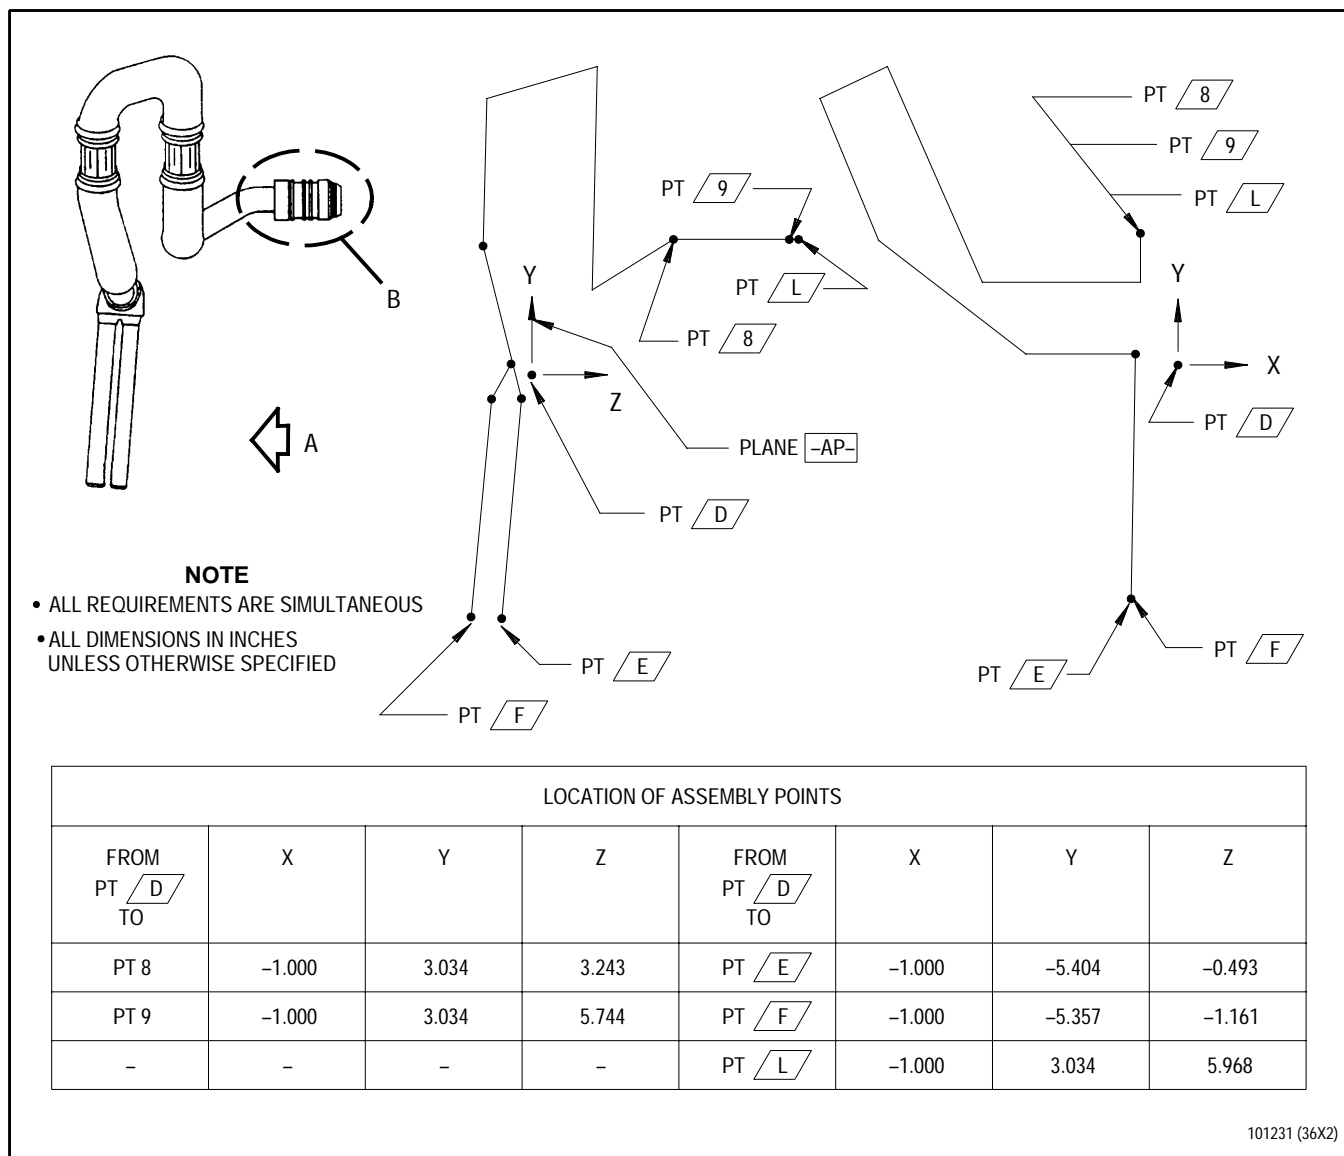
No. 4 Bearing Left Internal Scavenge Tube Assembly - Assembly and Brazing Positional Requirements (Sheet 1 of 2)
